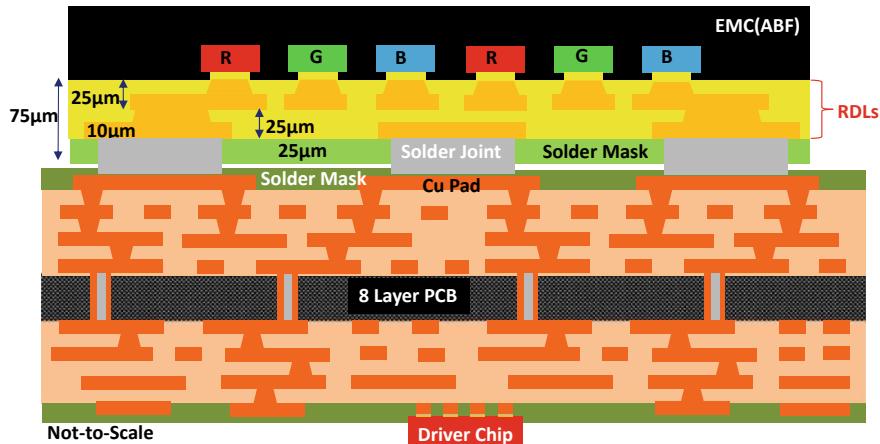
Cross section schematic of the test mini-LED RGB SMD package PCB assembly
